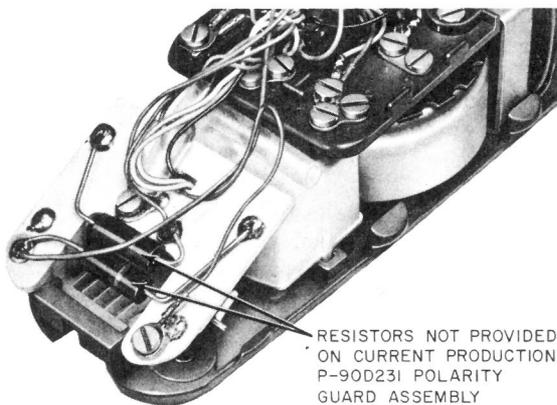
P-90D231 Polarity Guard Assembly, Installed
